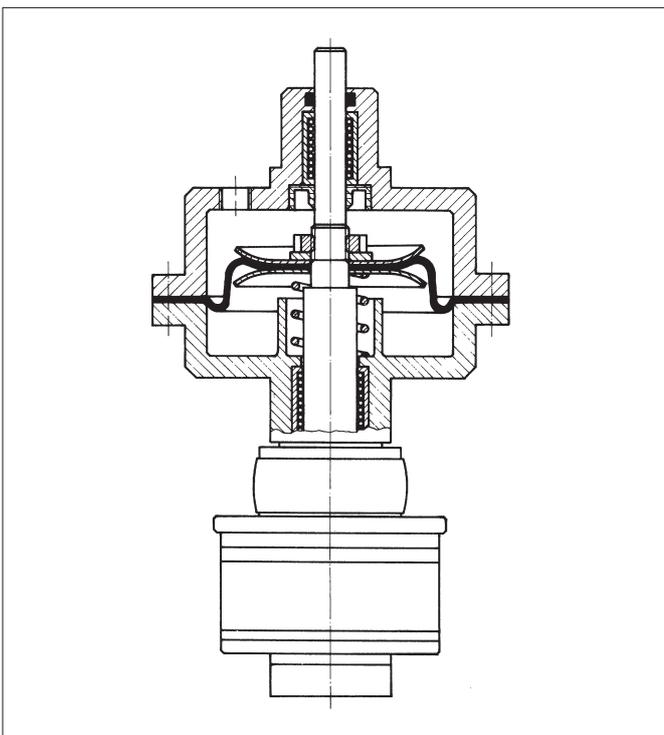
Welding Head with Diaphragm
